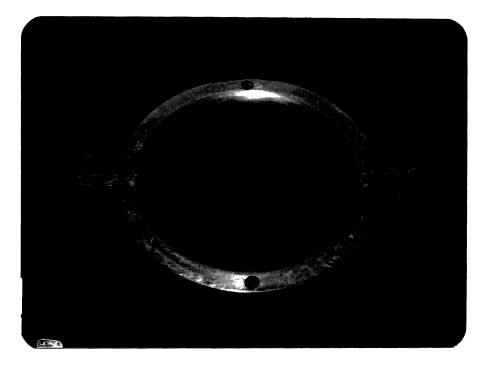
Photograph of the Two-Piece Mould for Circular Ring with Concave Cross-section
